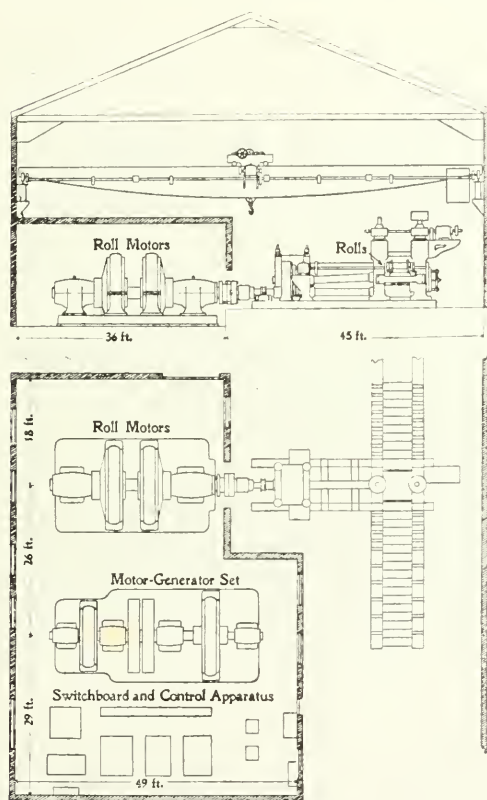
PLAN AND ELEVATION SHOWING ARRANGEMENT OF APPARATUS
